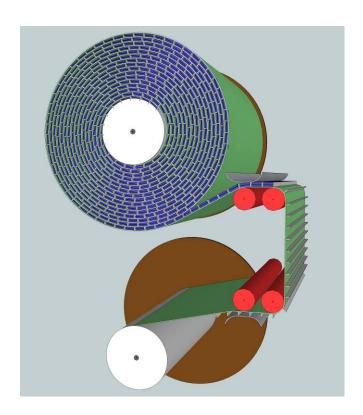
Full Supply Roll (Spool ends removed for clarity)
